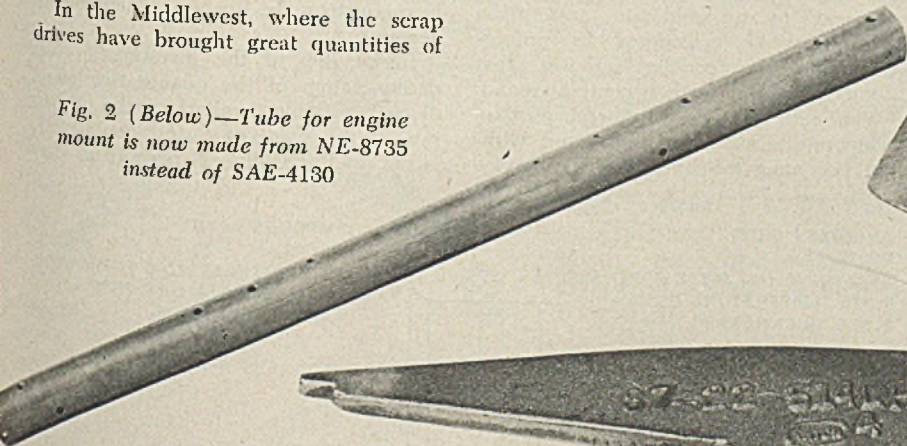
(Below) — Tube for engine mount is now made from NE-8735 instead of SAE-4130
